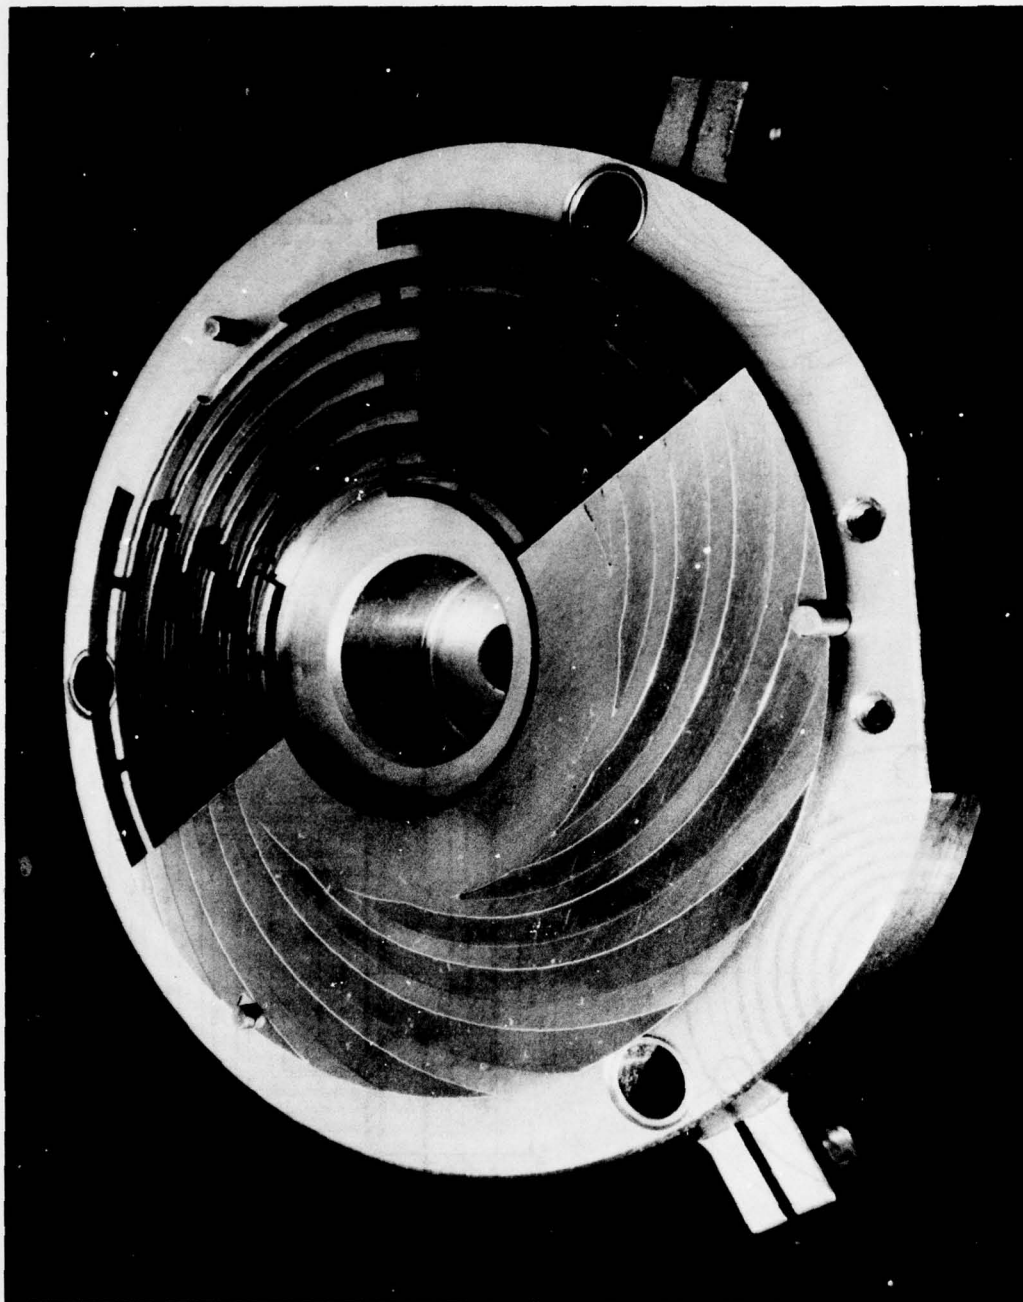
VIEW OF ASSEMBLED FLEXIBLE THRUST BEARING LLF-2T WITH SECTORS OF THE SPIDER SPRING AND SPIRALLY GROOVED MEMBRANE REMOVED
